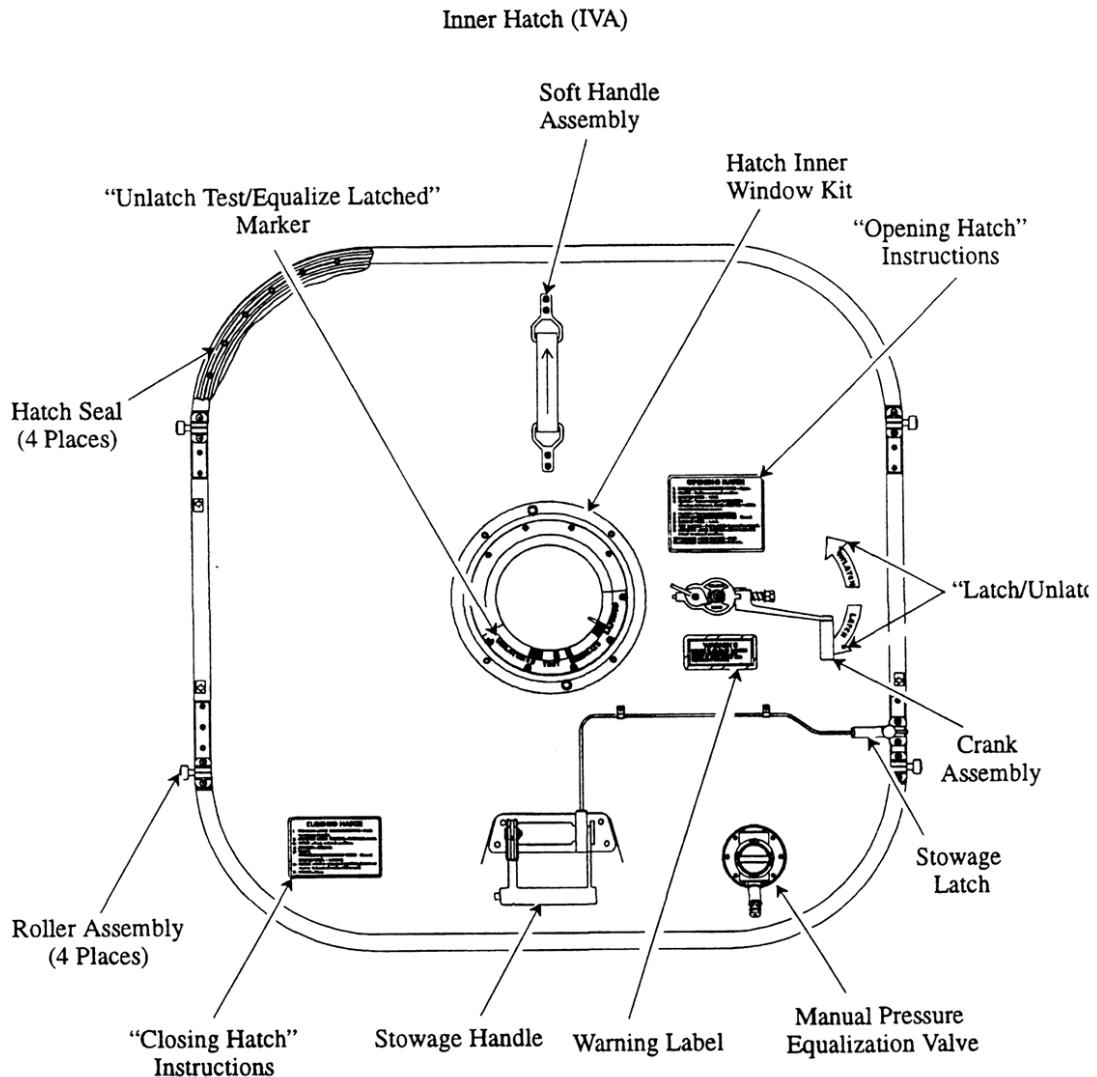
Inner hatch EVA technical drawing of the ISS hatch [14].
